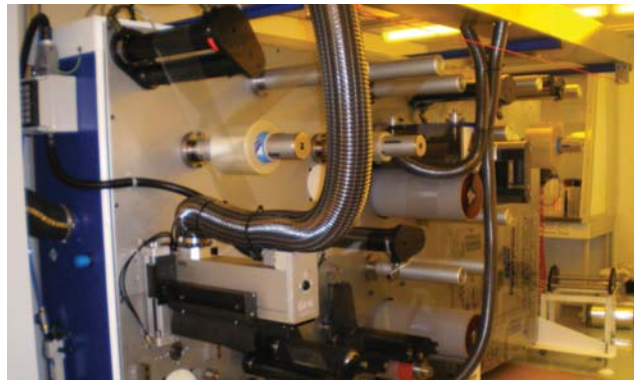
UV Embossing Machine (Courtesy Carbonlite Converting Equipment Ltd., UK)
